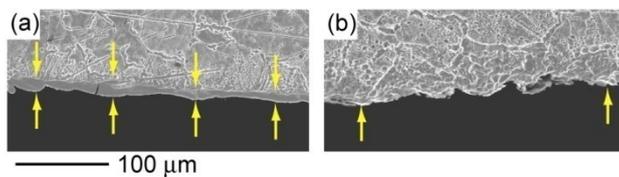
Sectional view of surfaces machined using: (a) WEDM, (b) AWEDM.
